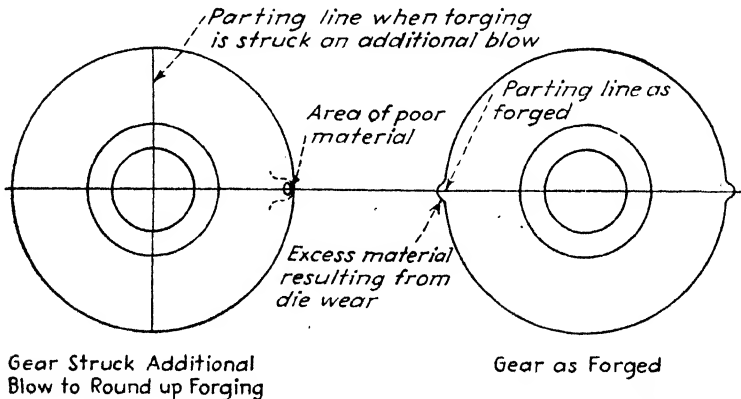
Effect of die wear and restrike blows on gear forging.
